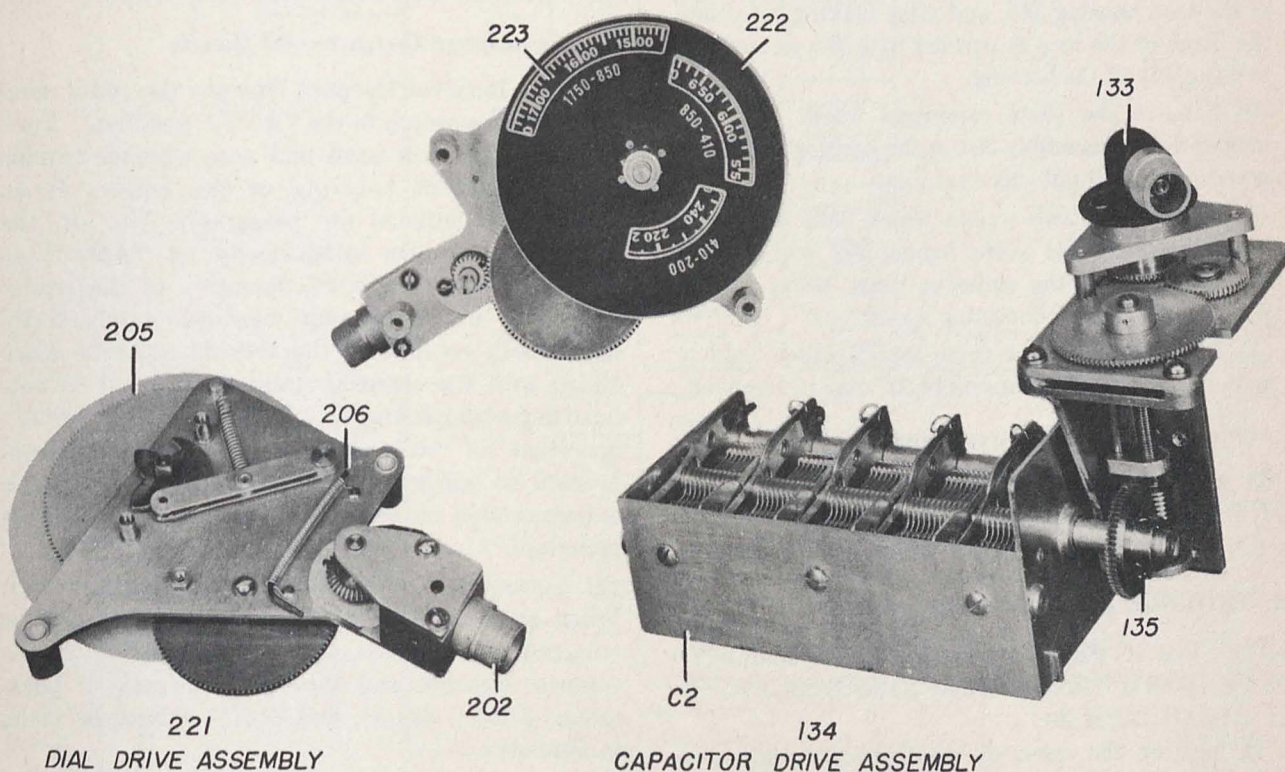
DIAL DRIVES AND CAPACITOR DRIVE ASSEMBLIES
